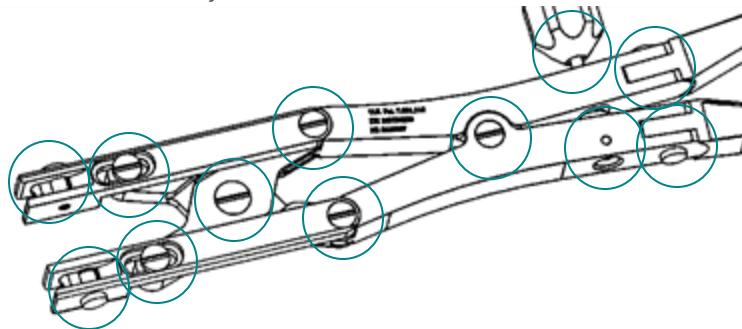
Example of forcipes (compressor) with bearing surfaces that have to be lubricated (circuited areas)
